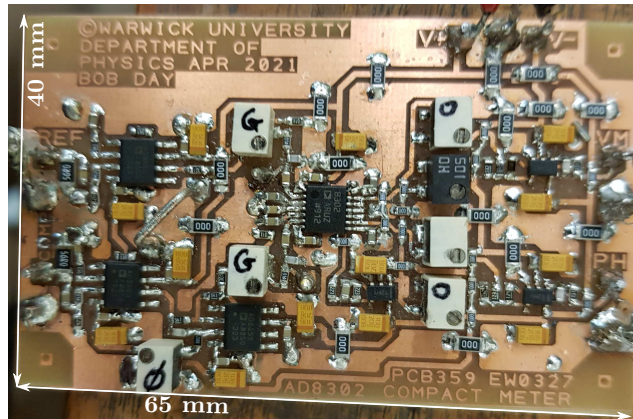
Image of printed circuit board for compact meter showing dimensions.
